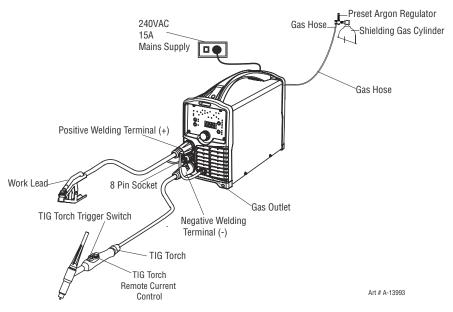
Setup For TIG (GTAW) Welding
